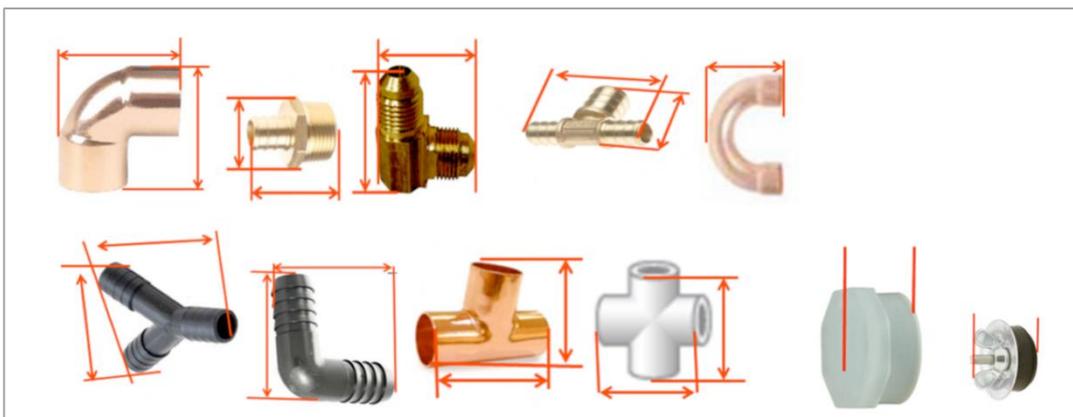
examples of pipe and tube fittings, manifolds miscellaneous parts
